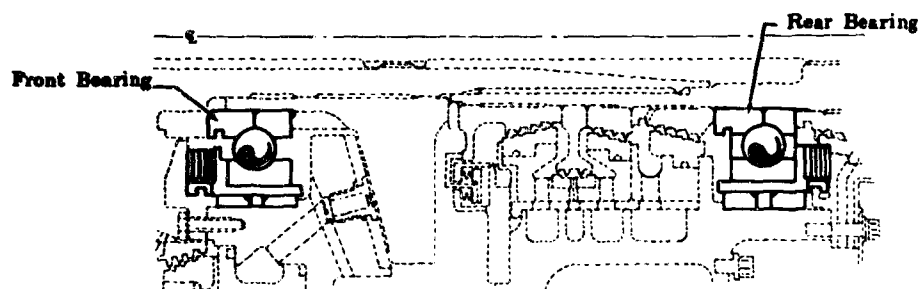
Oxidizer Turbopump Bearings and Bearing Mounts FD 33096
